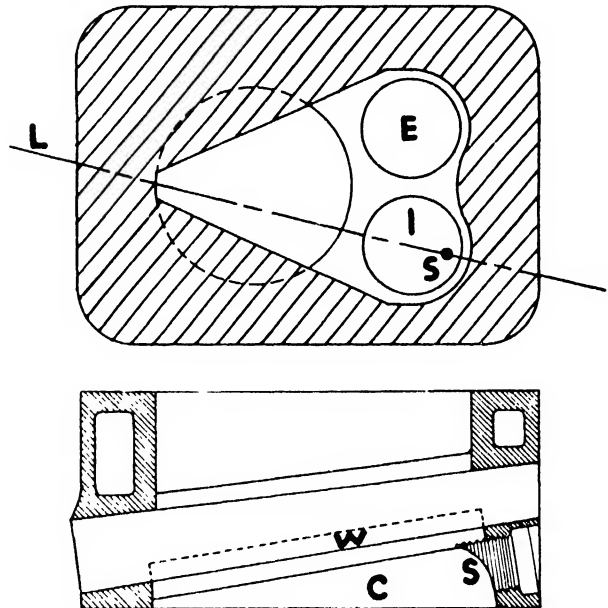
Schematic diagram of combustion chamber B. S, spark-plug location; W, window; L, centre-line of window; I, intake valve; E, exhaust valve; C, combustion chamber.
